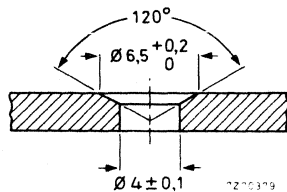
Shape of hole for 500 V insulation, nut fastening.
